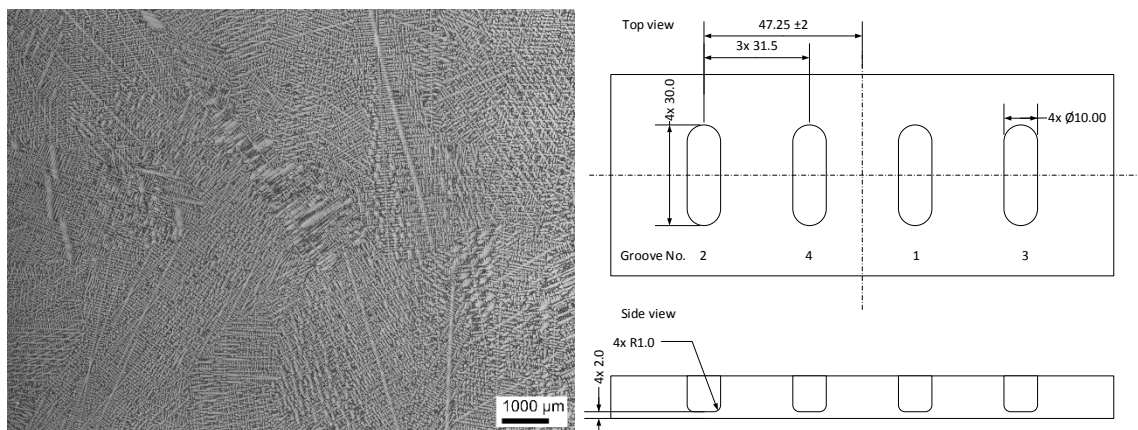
(a) Microstructure of the cast plate (b) Dimensions and positioning of the welding grooves.
